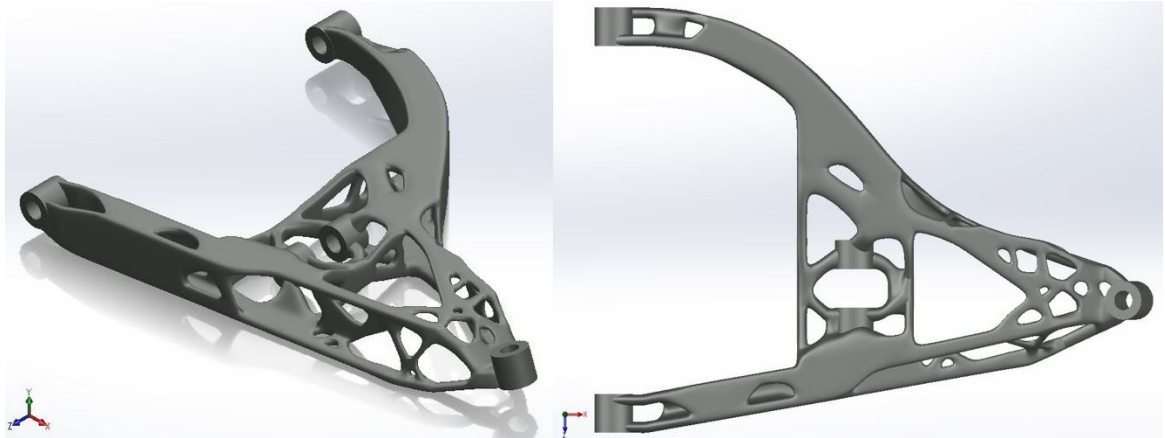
Lower A-arm iso and top (.step model in SolidWorks)
